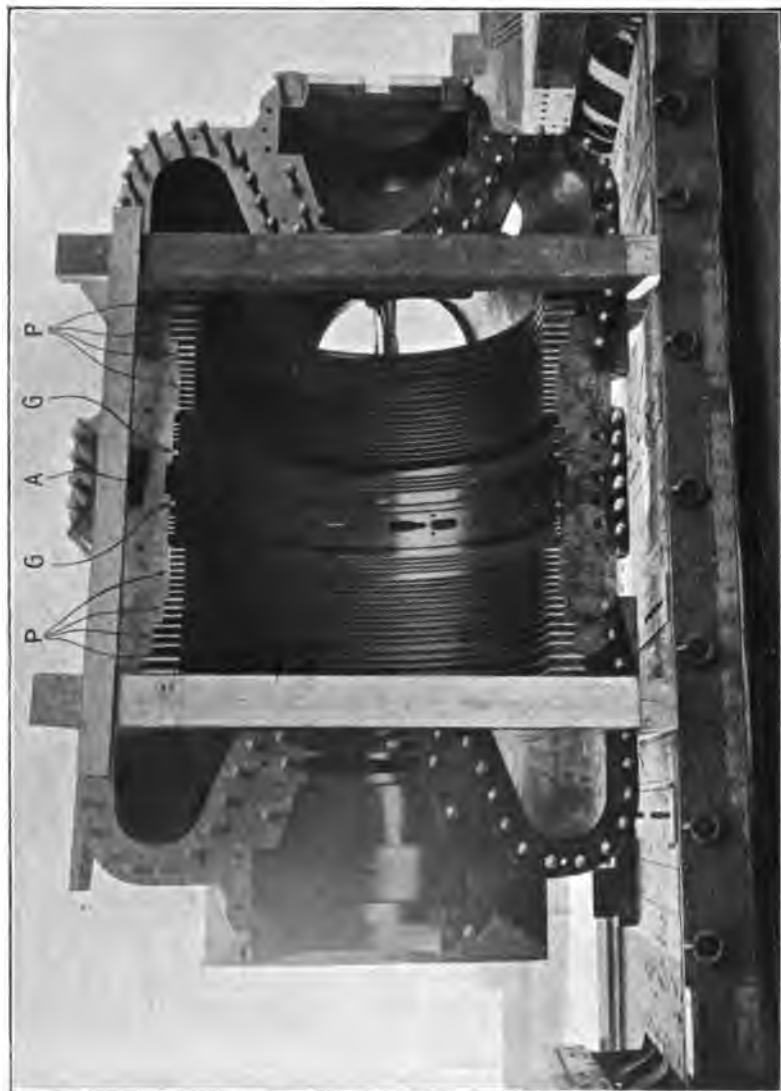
PLATE XXVII., FIG. 322.—HALF CASING OF 5500-K.W. WESTINGHOUSE DOUBLE-FLOW STEAM TURBINE.
